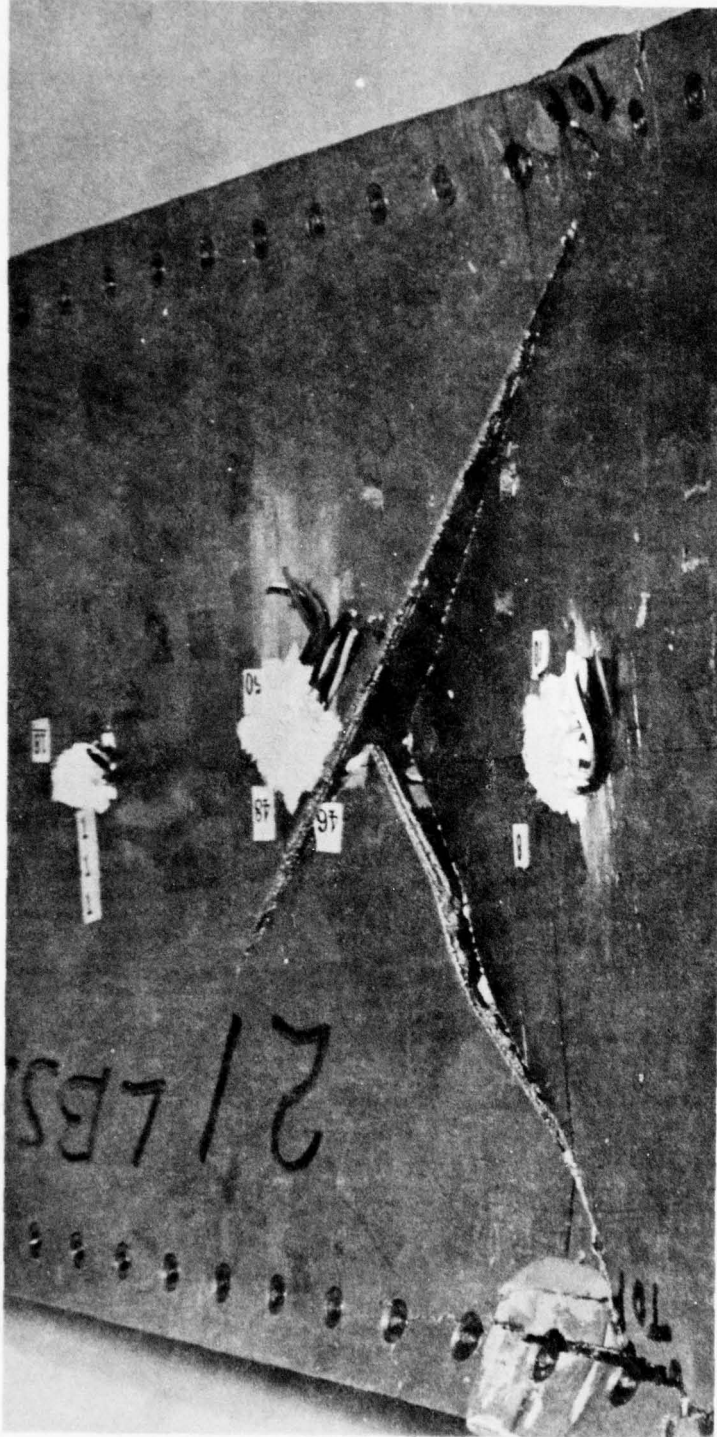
BOX BEAM SUBCOMPONENT FAILURE LOCATION
